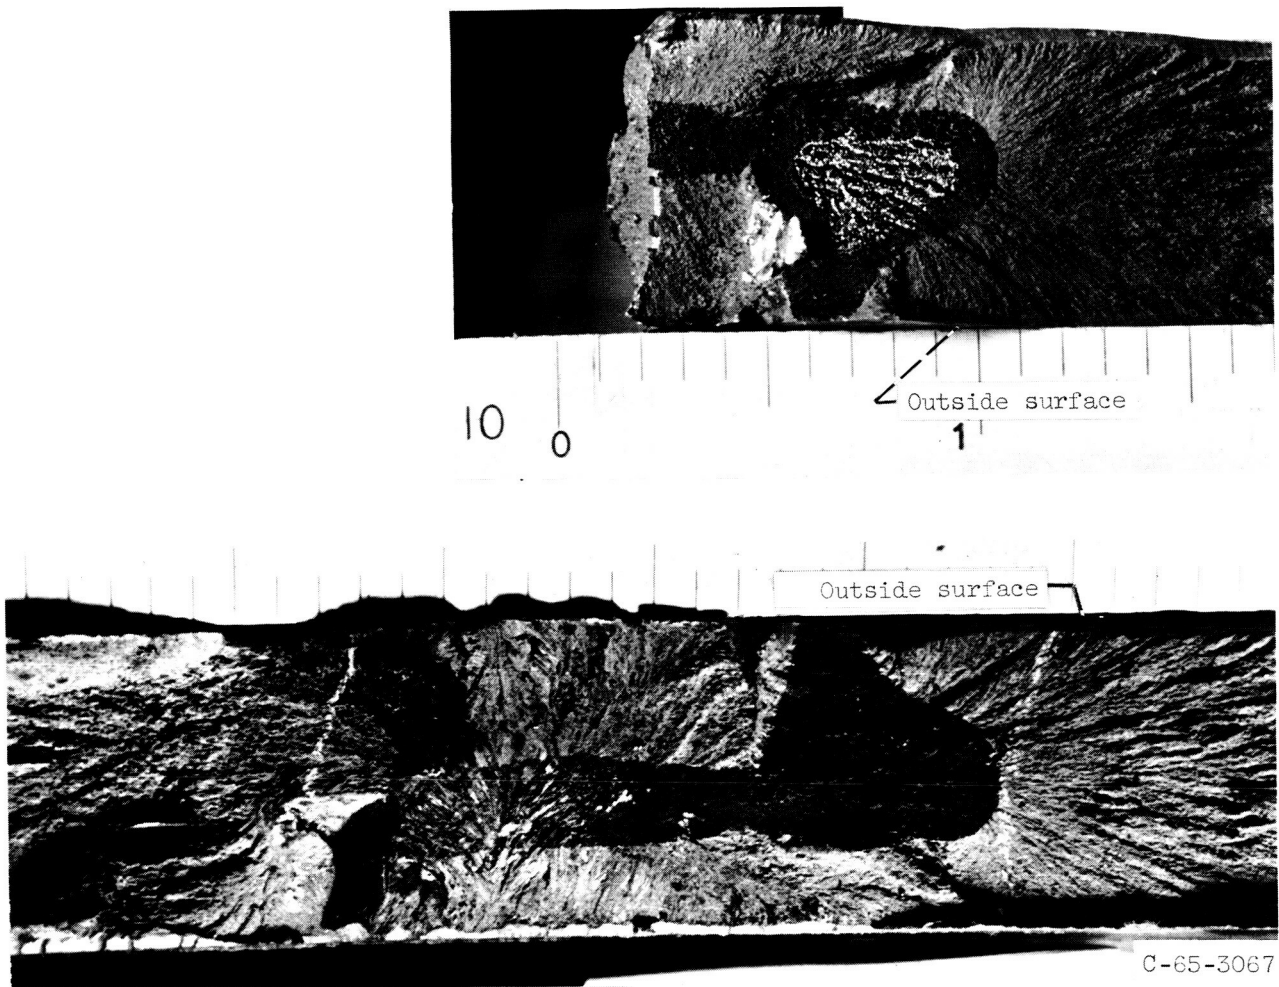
Mating surfaces of black origin on W7/302 weld. (Part of black material has been removed from one surface for analysis.)
